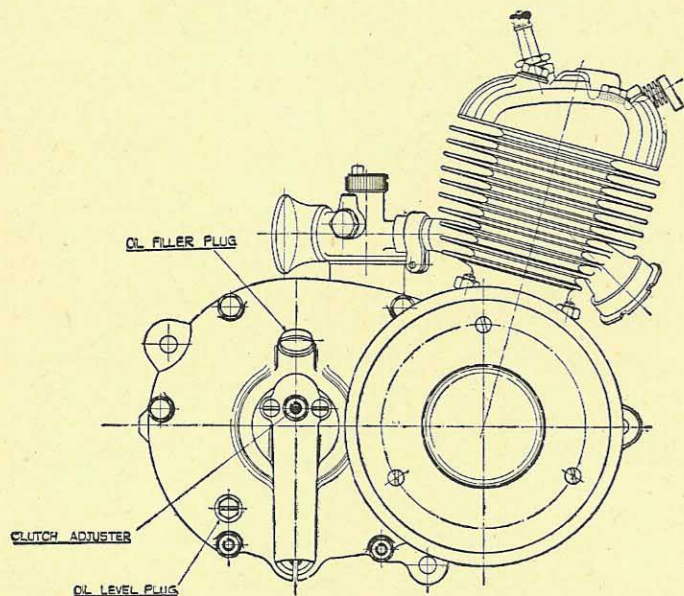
OIL FILLER PLUG, OIL-LEVEL PLUG AND CLUTCH ADJUSTER ON THE MARK 2F UNIT.
